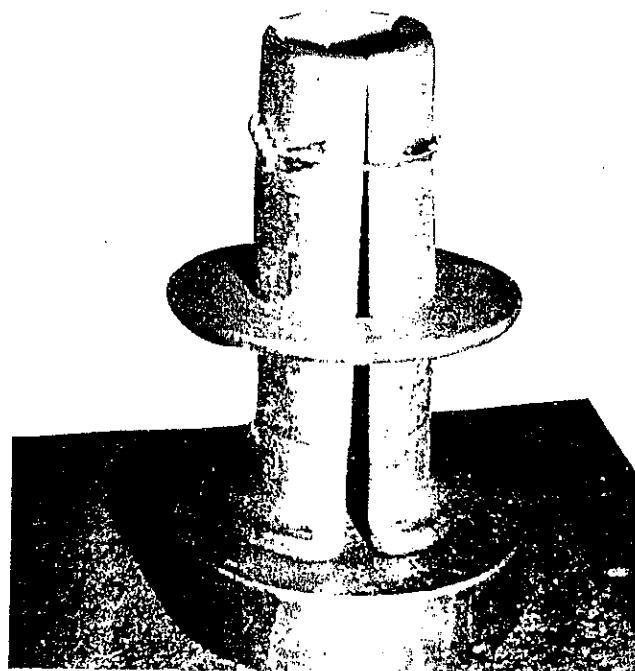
FRICTION UNIT COMPLETE, ready for assembly with friction sleeve and coil spring
